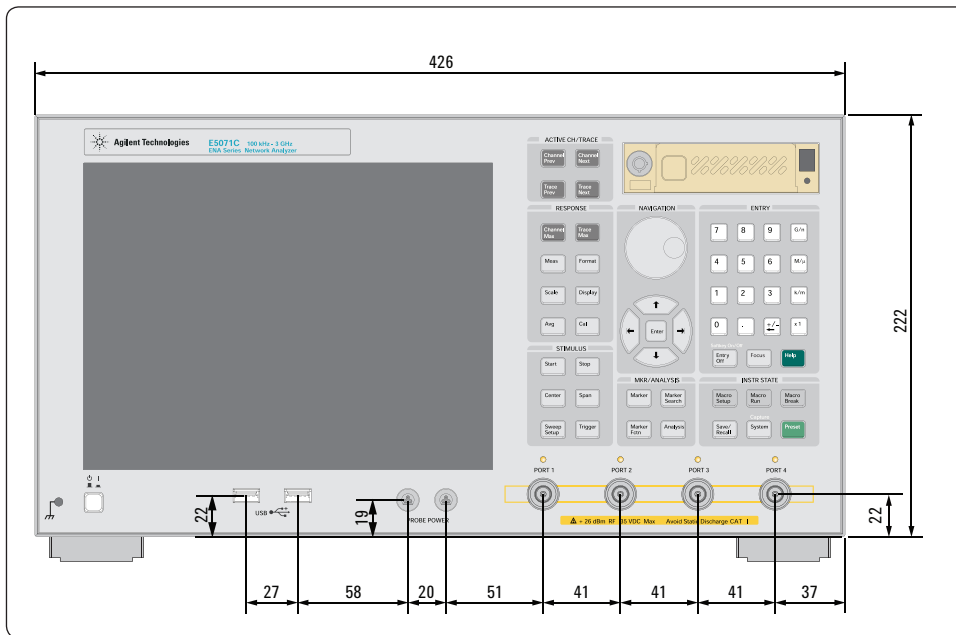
Dimensions (front view, E5071C with Option 430/435/440/445/460/465/480/485, in millimeters)
